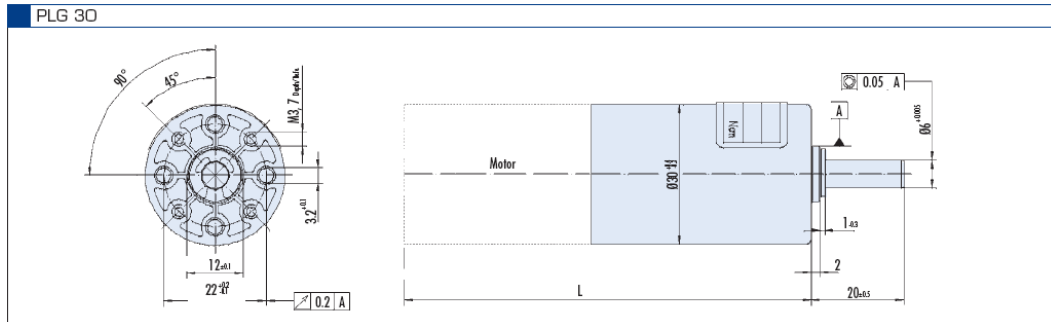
Dimensions of DunkerMotoren PLG 30 Planetary Gearbox (in mm).
